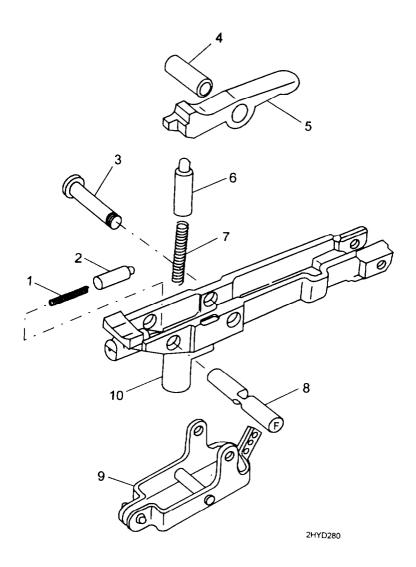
Group 06 Sear and Safety Housing Assembly (M60D only), PN 11699773
